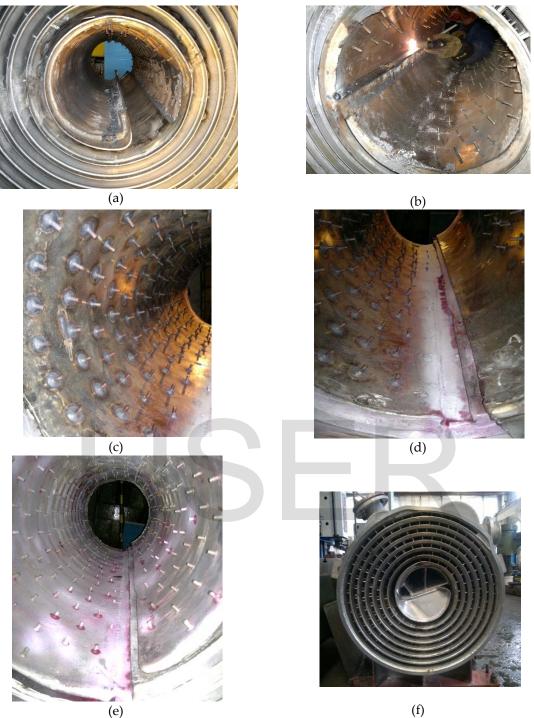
New repair technology of a spiral heat exchanger: a -removing the nucleus; b - elimination of spirals flawsby plasma cutting; c - repair flows by welding; d - penetrant testing along generators; e - local penetrant testing; f - spiral heat exchanger repair.
